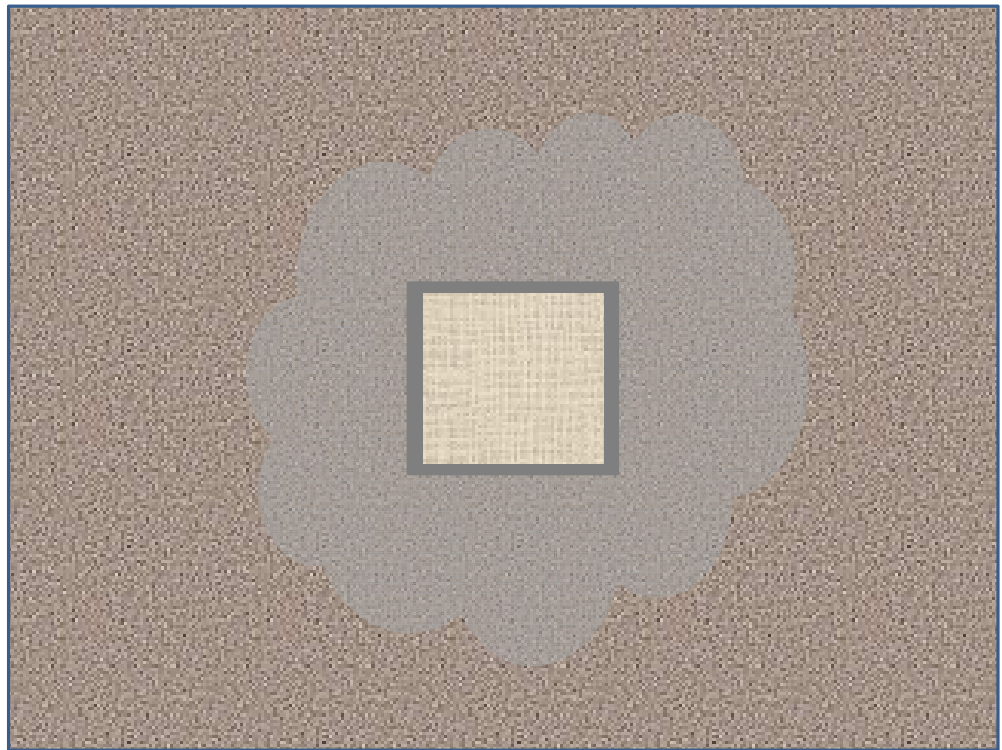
Sand Surrounding Area with 400 Grit Paper for Patch Adhesion & Remove Dust
